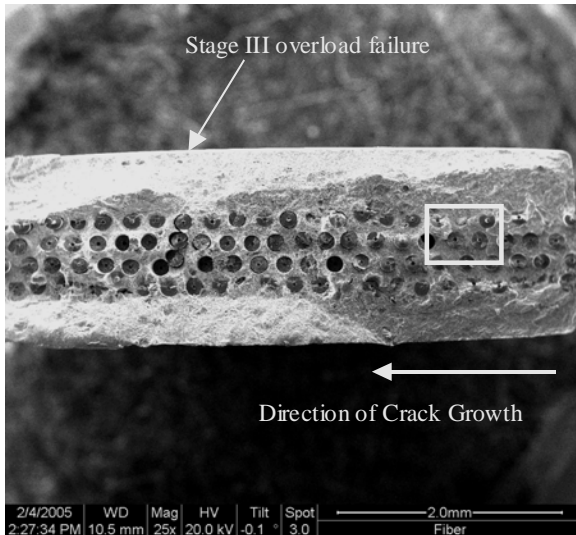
Specimen F/G-09, fracture surface (looking toward composite side)
